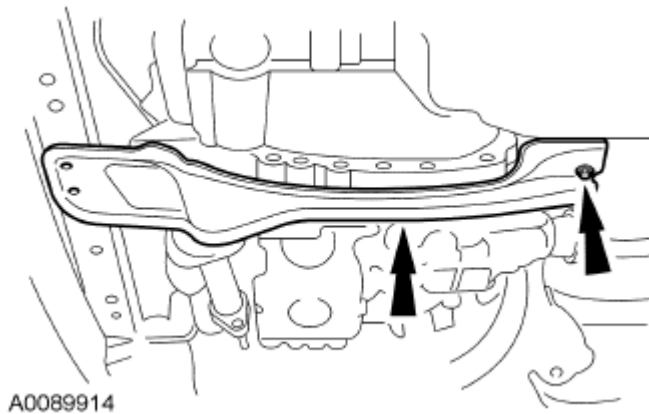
Locating Rear Nut And Engine Support Crossmember
